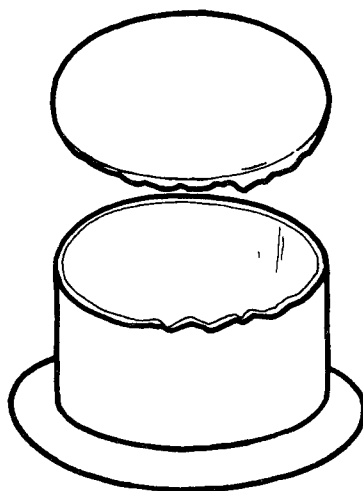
Fractured part bottom resulting from too sharply radiused punch (9)
